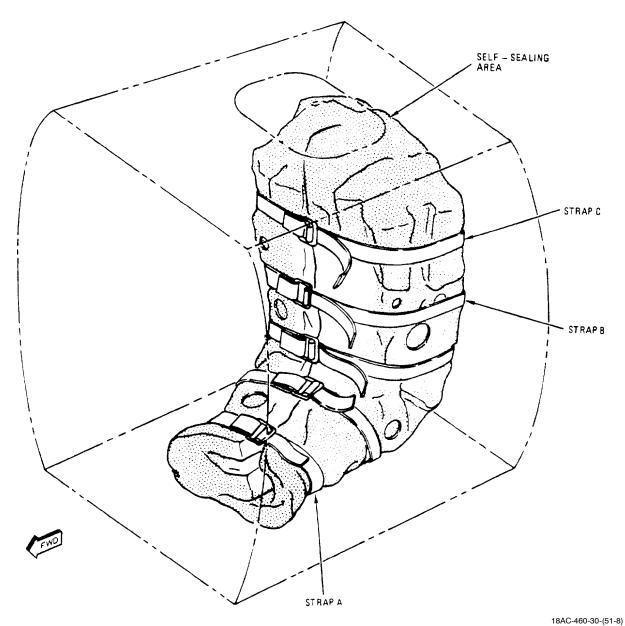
Removal - No. 2 Fuel Tank Folding (Sheet 8)
